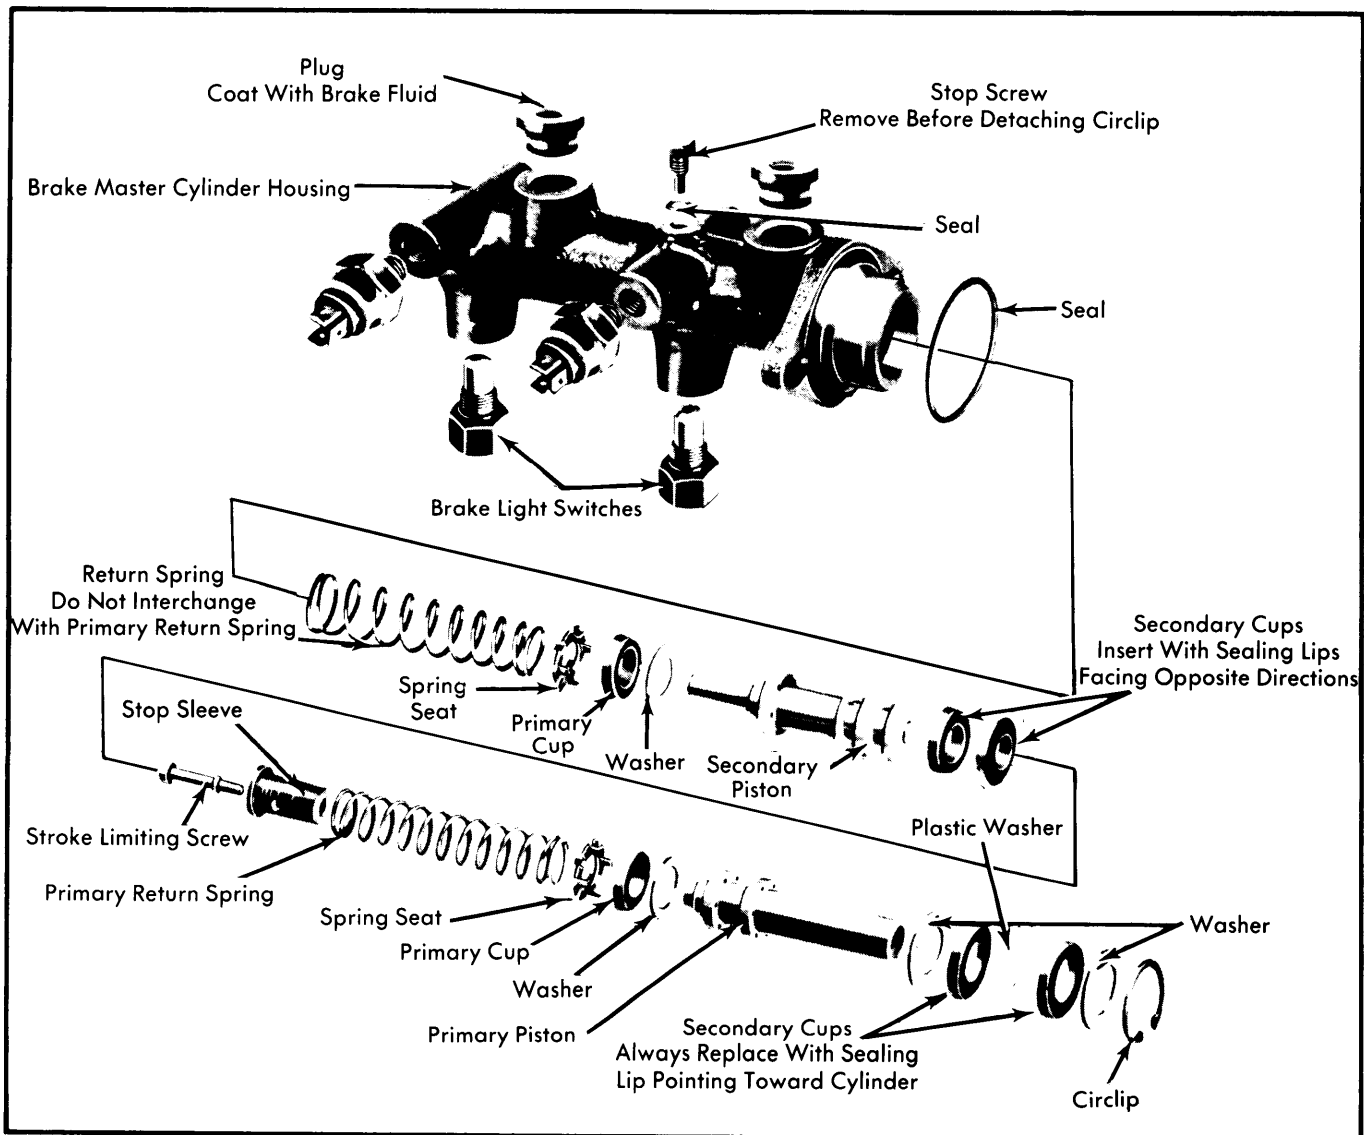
Master Cylinder Component Relationship — Rabbit, Scirocco, Dasher Shown — Others Similar
